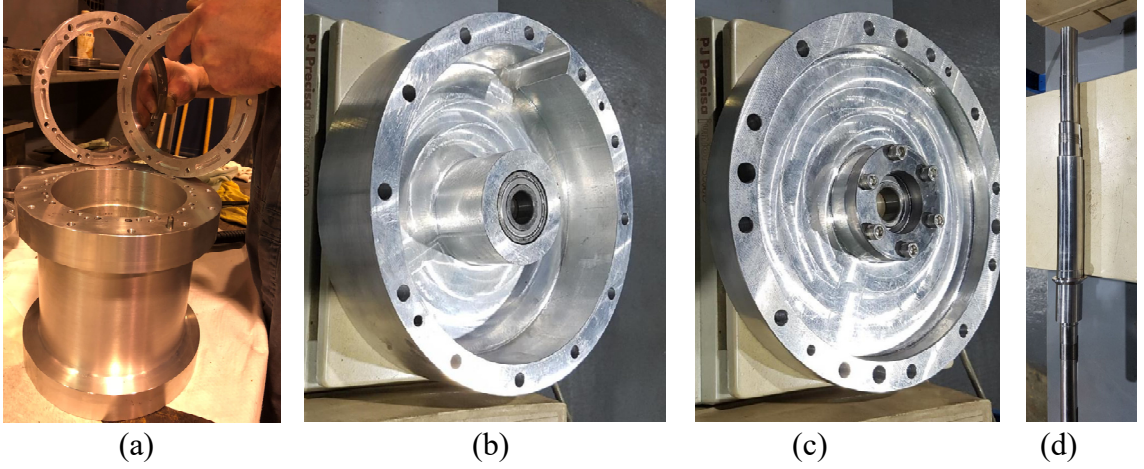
Housing components of the developed high speed IM. (a) Main body of the housing and cooling channel sealing. (b) end cap. (c) front cap. (d) shaft.
